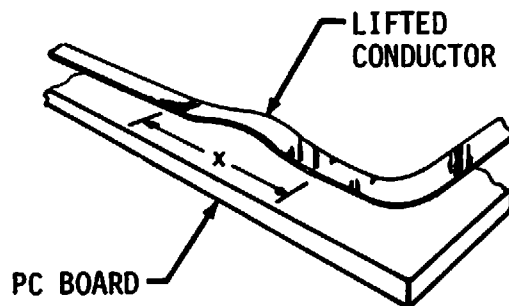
TYPICAL LIFTED CONDUCTOR
